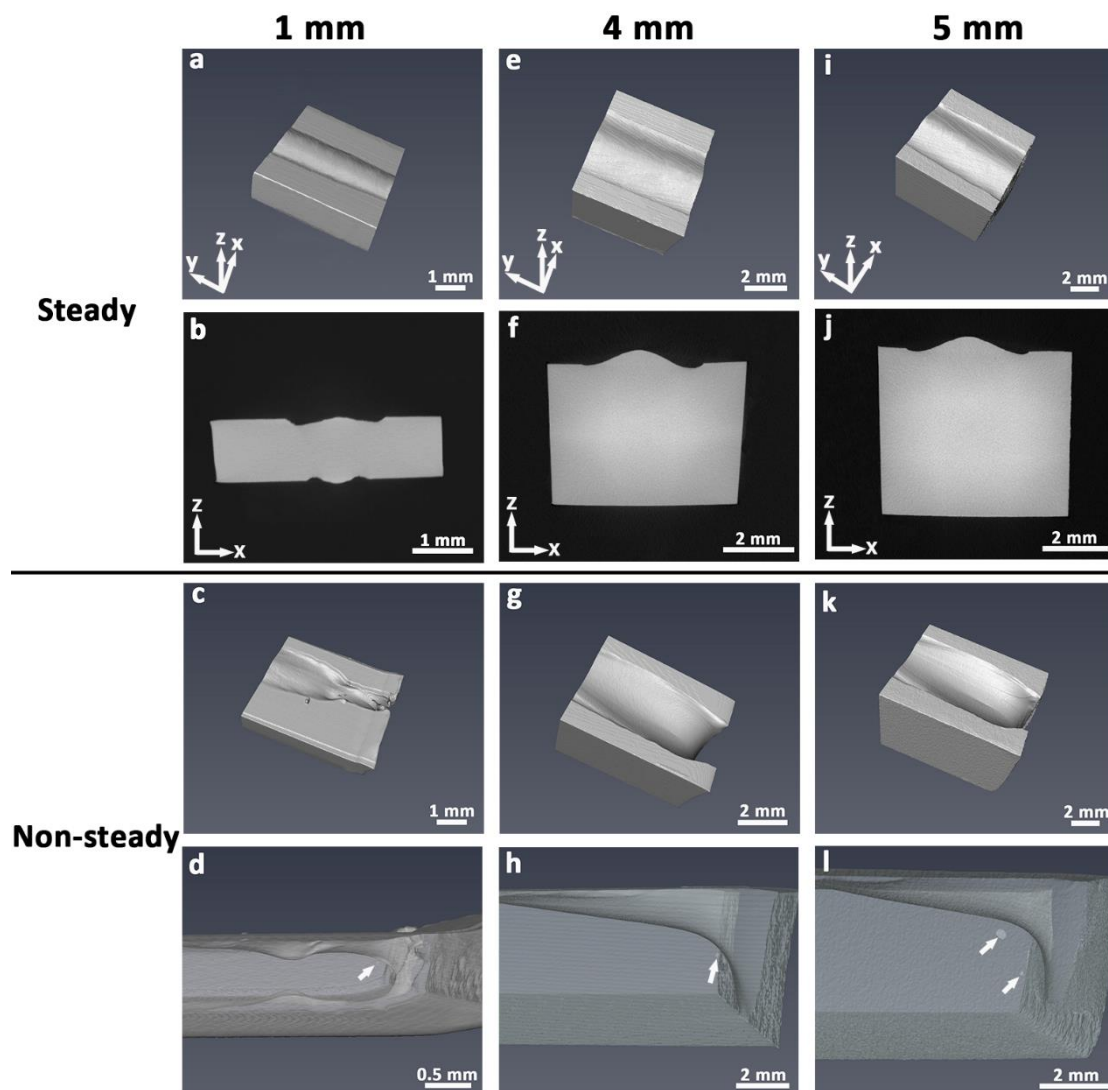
(a-d) Sample 1 (1 mm); (e-h) Sample 2 (4 mm); (i-l) Sample 3 (5 mm). (a, e, i) Reconstructed 3D X-ray tomography of steady state welds. (b, f, j) Longitudinal sections illustrating the weld shape and absence of pores in the steady state welds. (c,
